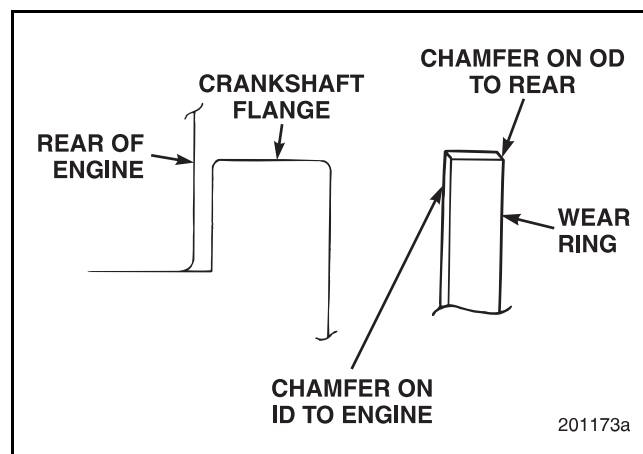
Proper Crankshaft Wear Ring Installation
